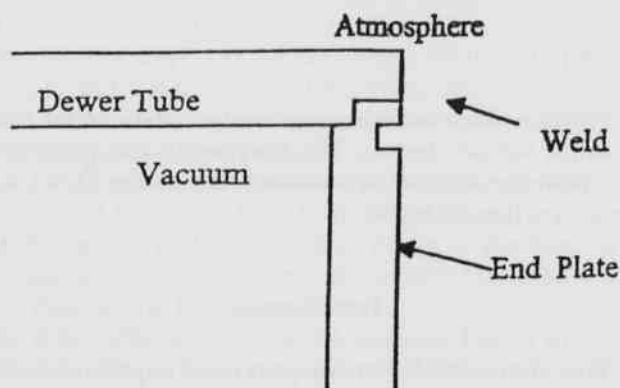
Welded connection between dewer tube and end plate showing improper weld location.
